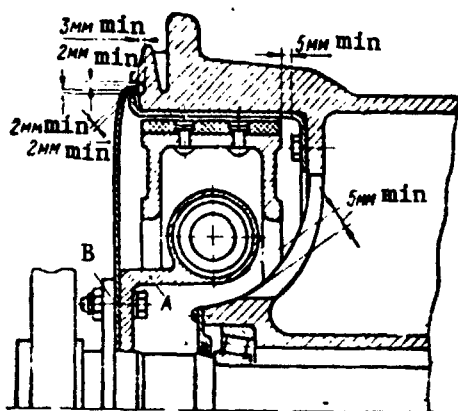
Brake installation on gear strut and minimal allowable clearances between individual brake and wheel components.
